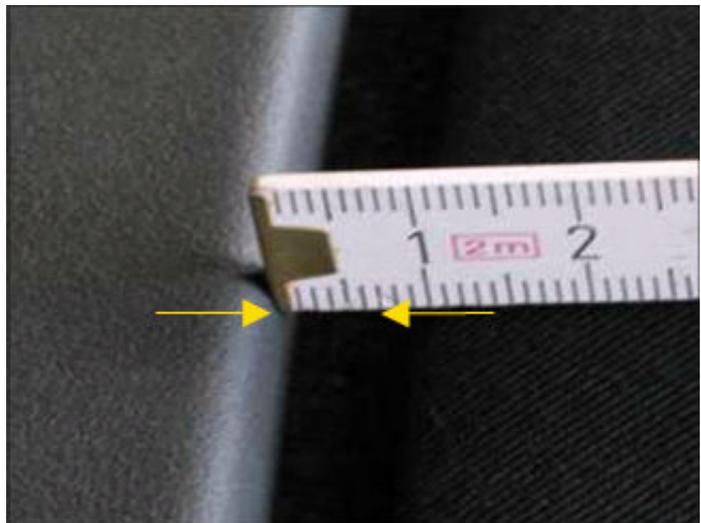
There should be 35 mm (tolerance +/- 5mm) from the windshield frame to the front edge of the roof.
